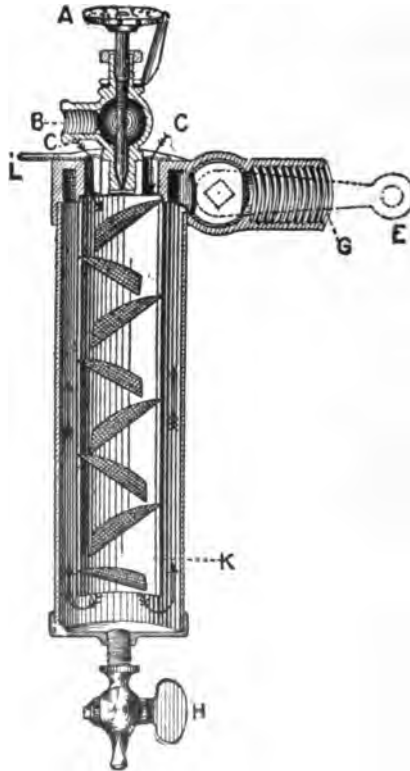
The "Auto" Carburetter. A, wheel controlling needle valve; B, gasoline inlet; C, C, air inlets; E, throttle lever; G, pipe to cylinder; H, drip cock; K, inner cylinder containing segments of wire gauze; L, valve controlling air inlets.
